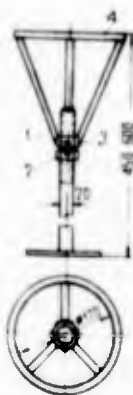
Attachment for Hatch Cover: 1, bracket; 2, threaded bushing (nut); 3, counternut; 4, support wheel
